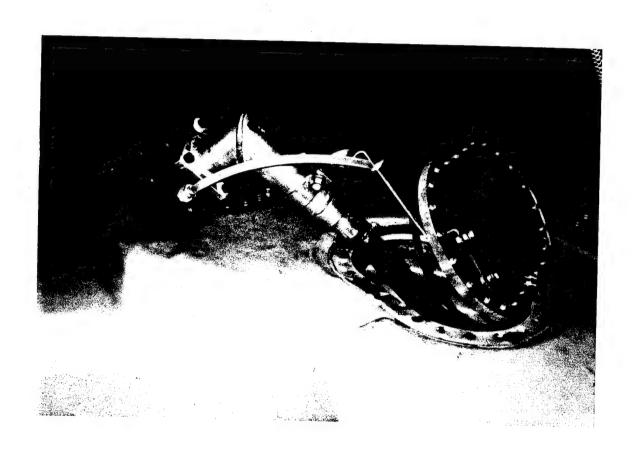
SHUT-OFF VALVE ASSEMBLY
